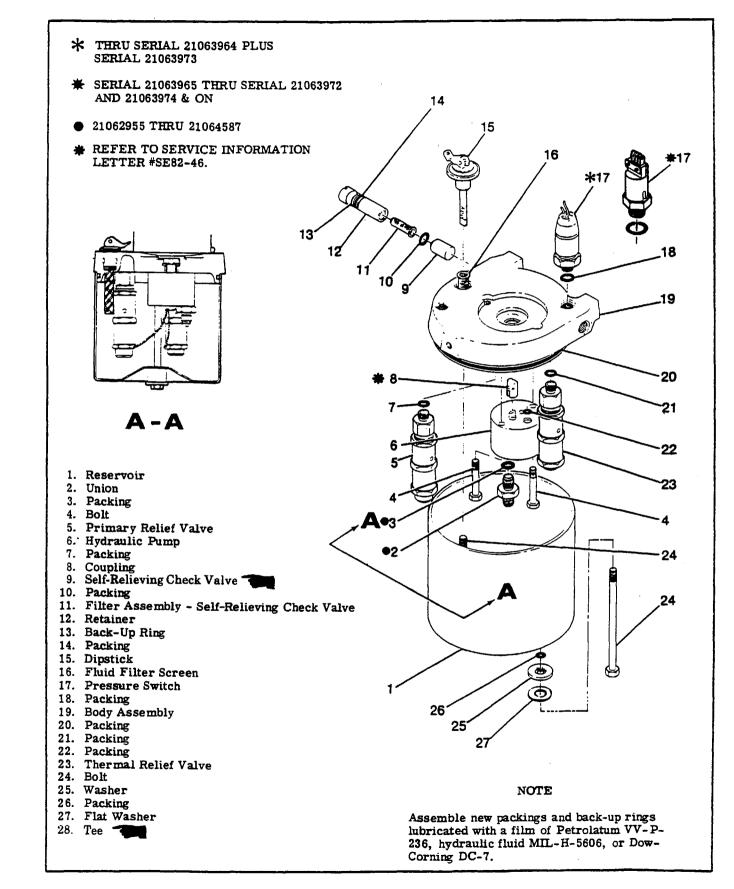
A-3. Hydraulic Power Pack Assembly (Sheet 1 of 2)
